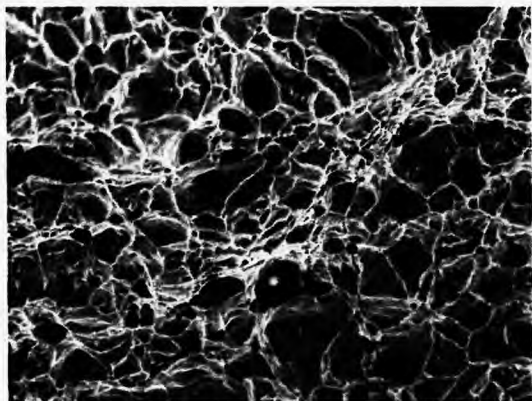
Fracture surface of AF (KCV₀ – x700)
